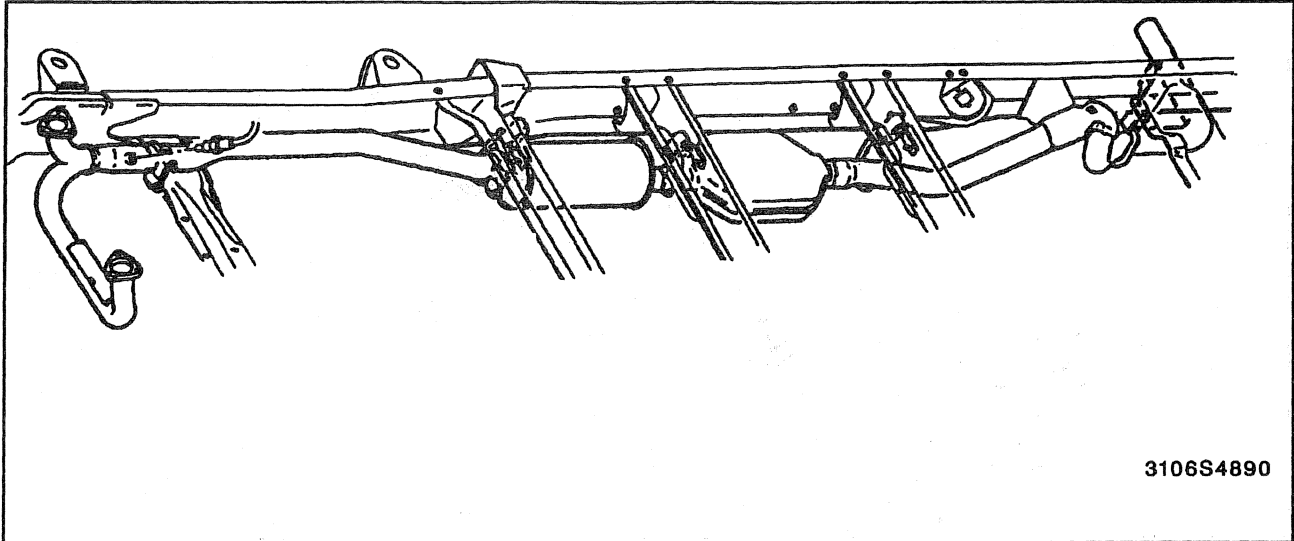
Exhaust System - C/K 3 Cab Chassis with L19
